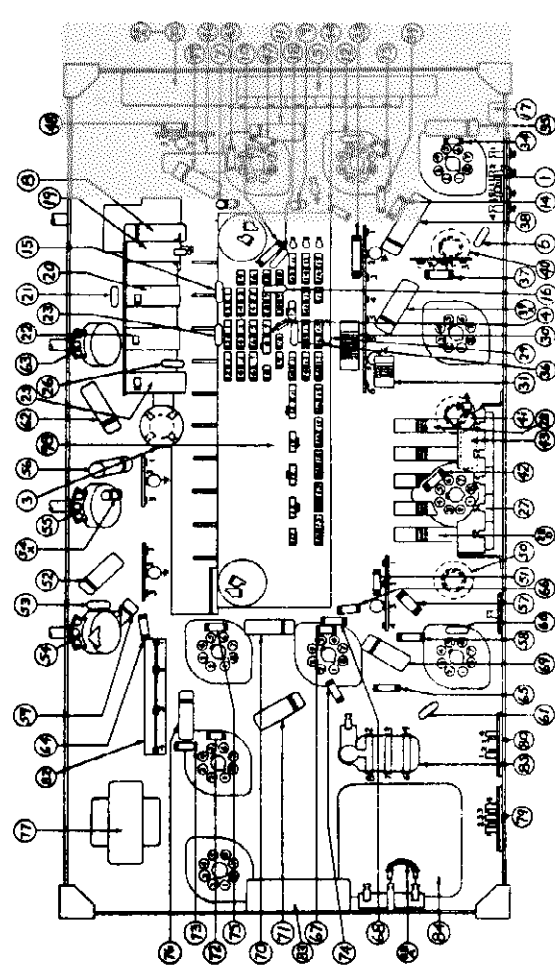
LOCATIONS OF PARTS—UNDER CHASSIS.
